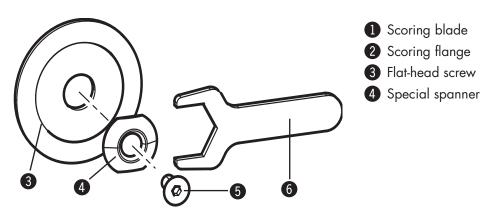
Scoring blade/Scoring flange/Flat-head screw/Special spanner
